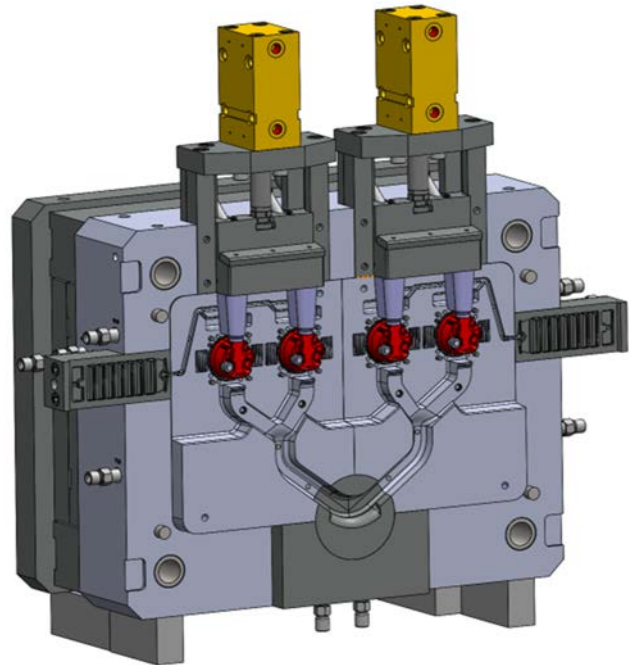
3D model of a movable part of the HPDC die casting mold, employed in the studies; cores have been marked by red colour
